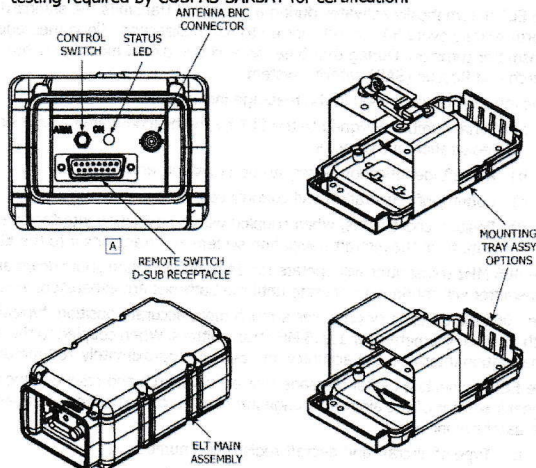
ME406 Series ELT and Mounting Tray Assembly
